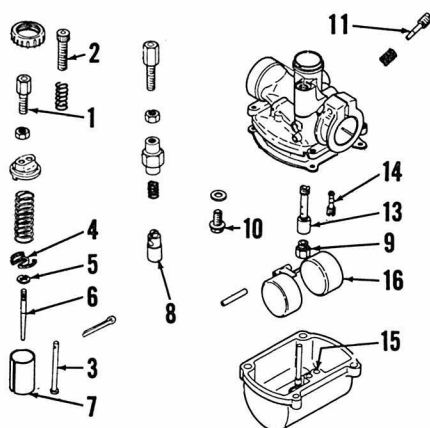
Exploded view of typical Mikuni carburetor.
